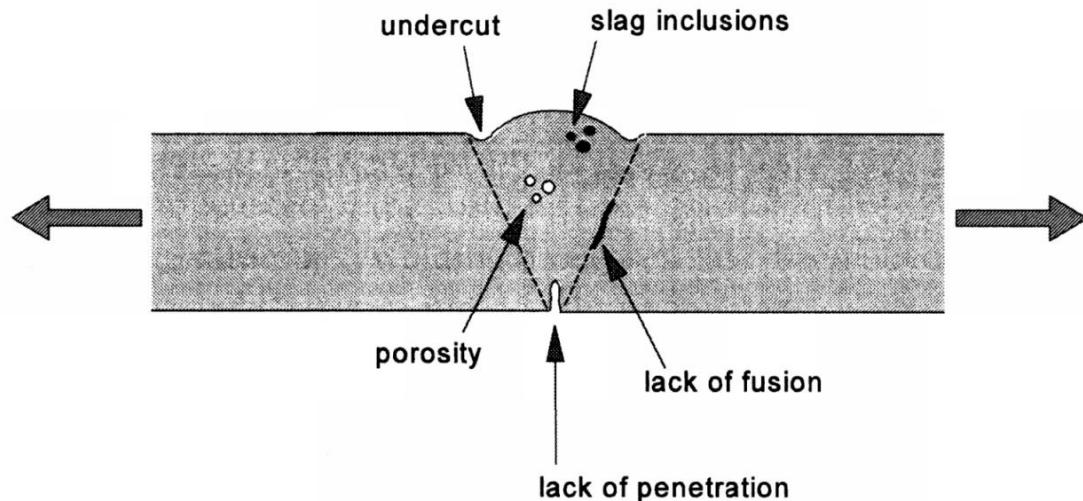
Illustration of weld defects, (Schijve 2009)
